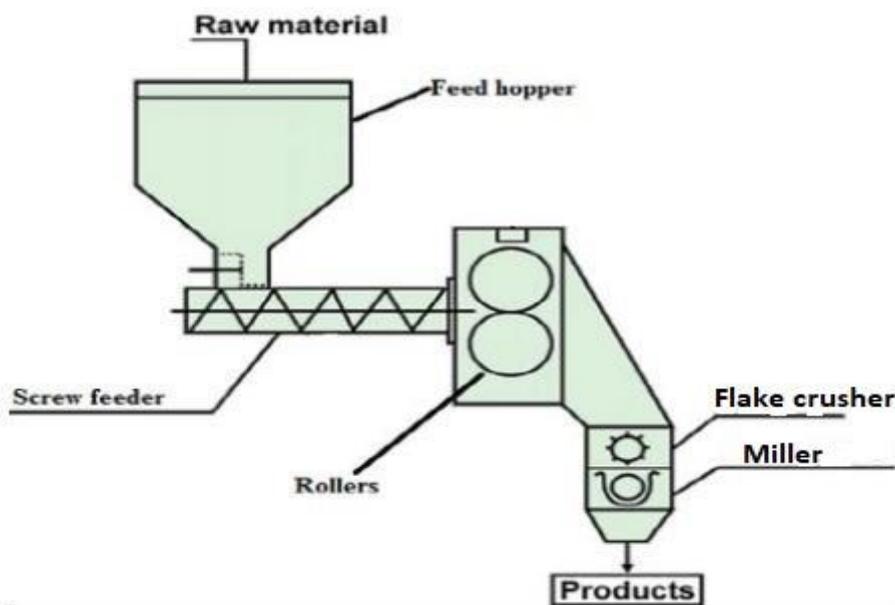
Diagram shows the main parts of roller compactor machine [2]
